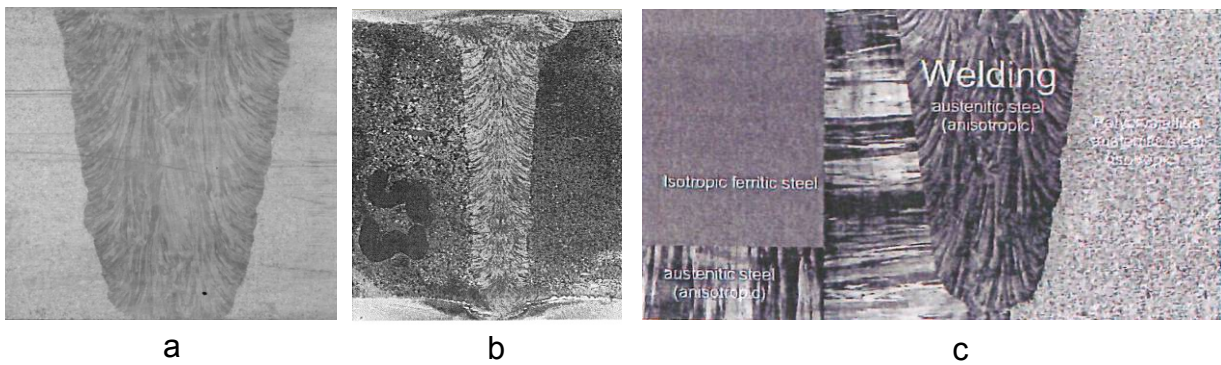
Columnar grains structure of austenitic weld materials: standard pipe to pipe weld (a), narrow gap weld (b), dissimilar weld (c)
